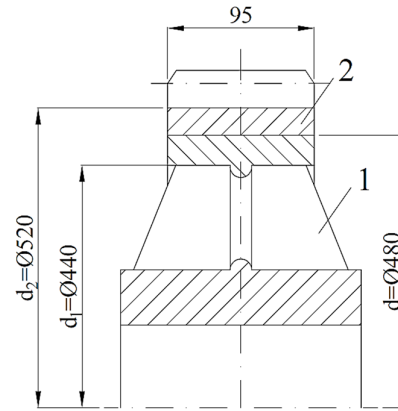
Construction of a gear wheel: 1 – cast iron (EN – GJL-100; 2 – Steel (41Cr4)
